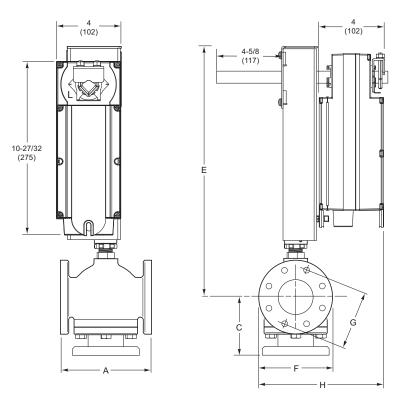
Mx41-6343 with Flanged 3-Way Globe Valve With AV-609-1 Linkage.
